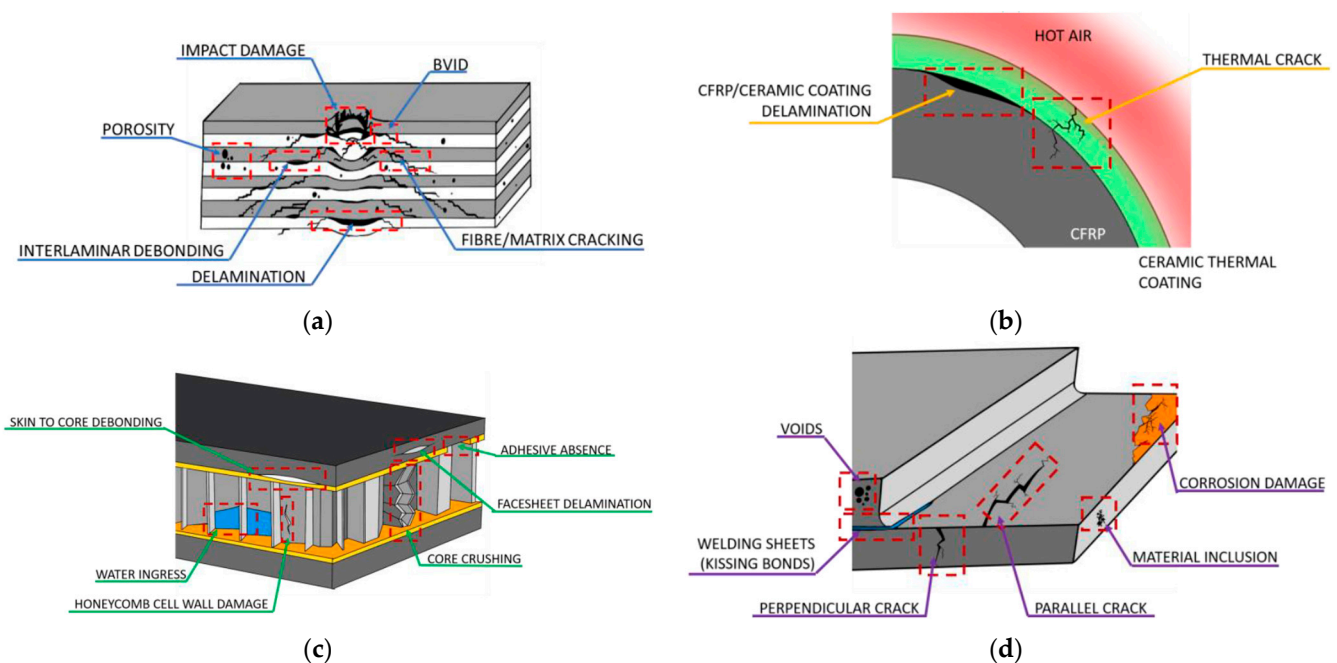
(a) Illustration of typical material defects for composite structures; (b) jet engine turbine blades; (c) honeycomb panels; (d) metallic aircraft and spacecraft components [39].
